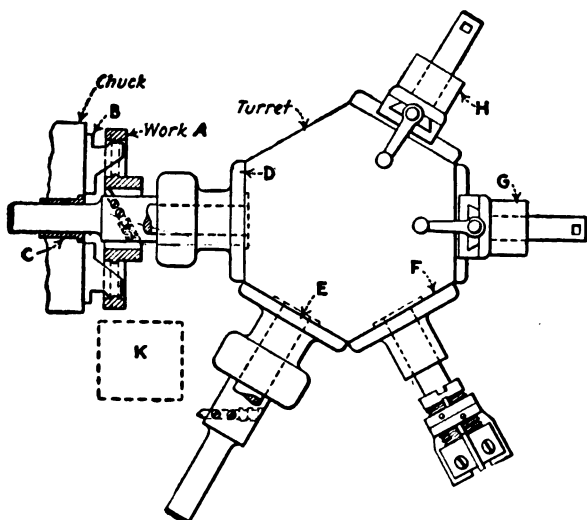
TURRET LAYOUT FOR PLAIN PULLEY
